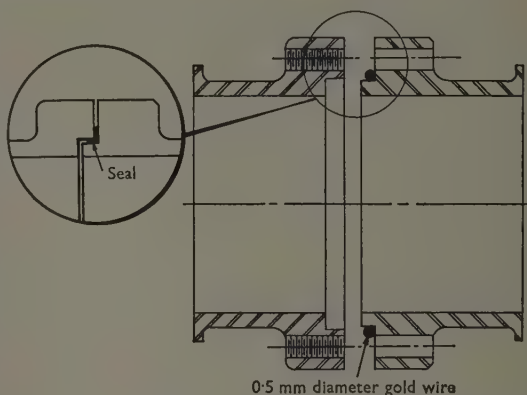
Ultra-high-vacuum joint with gold-wire gasket.
